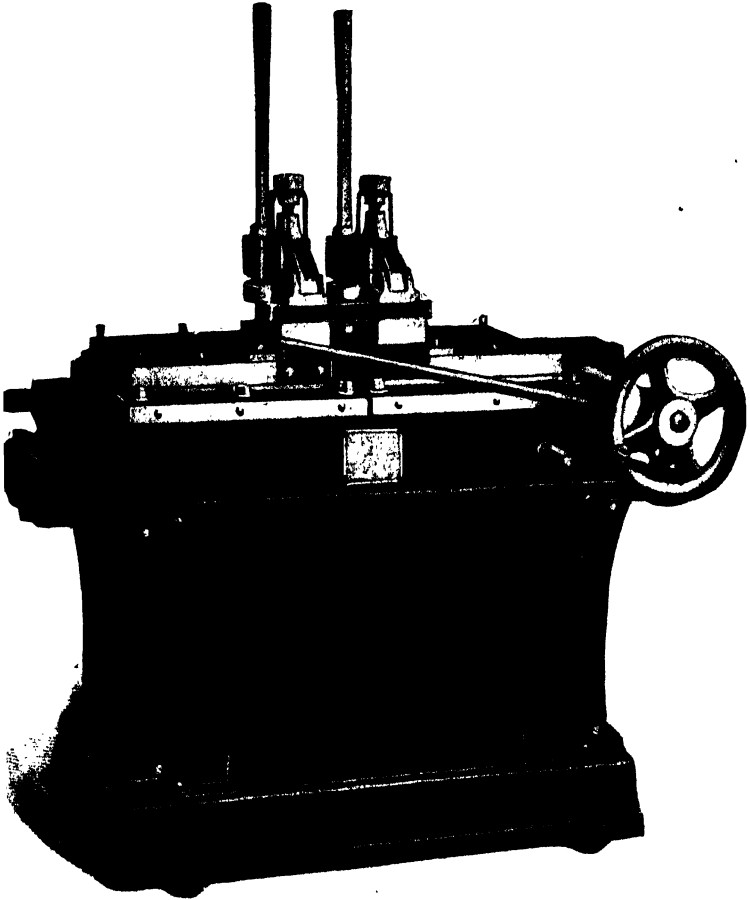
BUTT WELDING MACHINE FOR MODERATELY HEAVY WORK.
